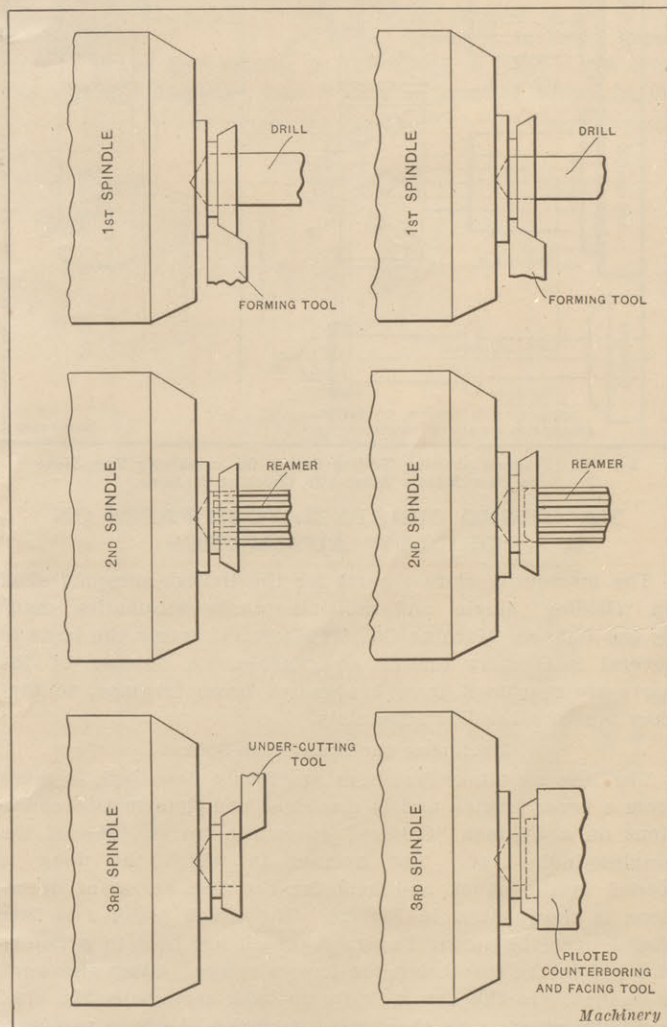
Diagram illustrating Set-up for machining Timing Train Rings on "Gridley" Automatic
